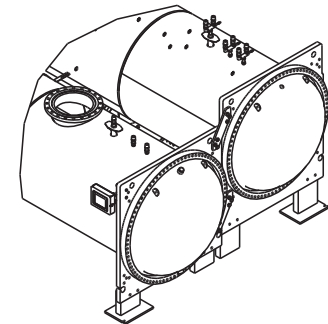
Relief Valve Arrangements, 19XR Two-Stage Compressor Frame Size 6
